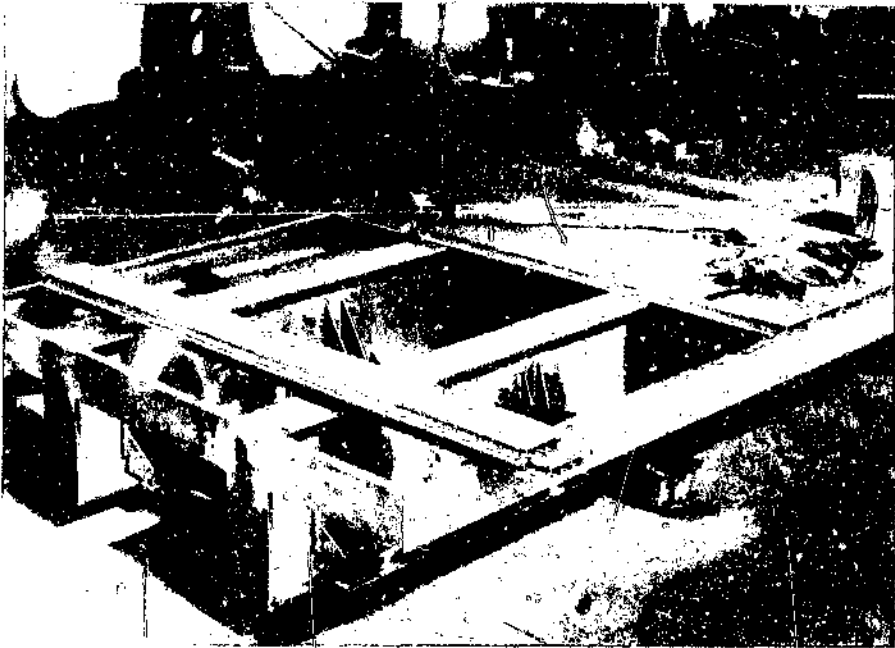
Welding and grinding of side and end rail structure
